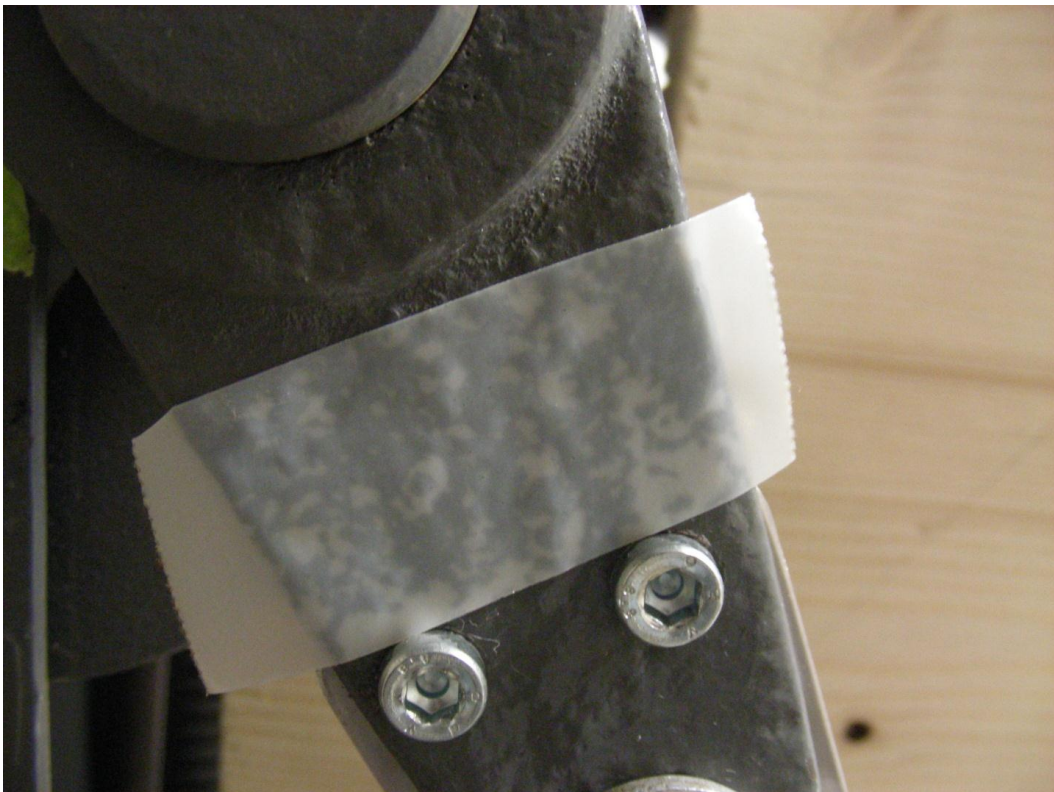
Preparing mounting position for the magnet. Thicker double-sided adhesive tape applied between MCVB and the magnet holding the sensor.
